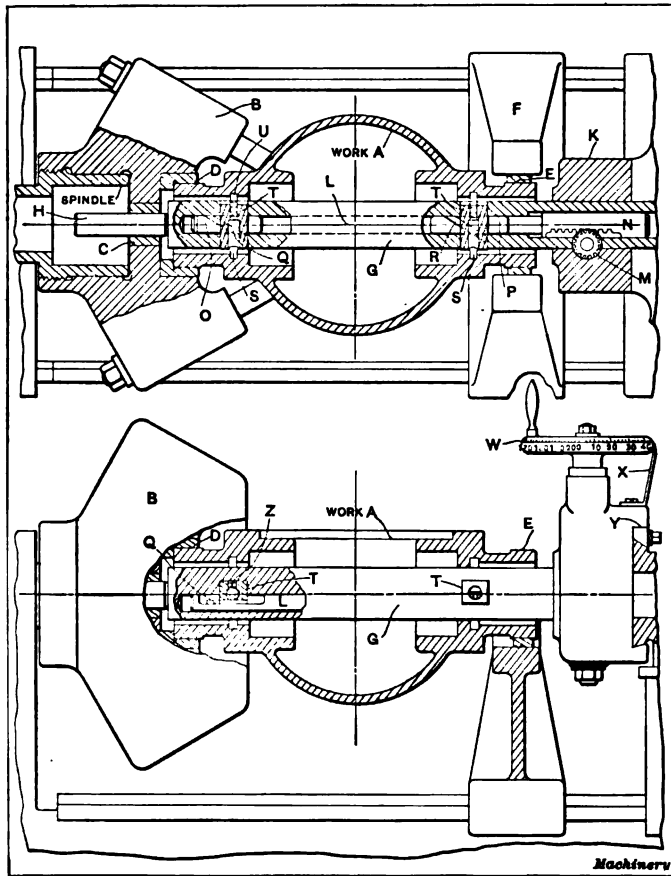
A Double Recessing Tool Arrangement for a Rear Axle Housing
